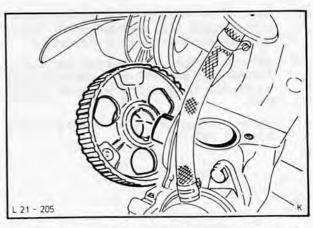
Fit auxiliary shaft pulley with reinforcing ribs facing cylinder block
